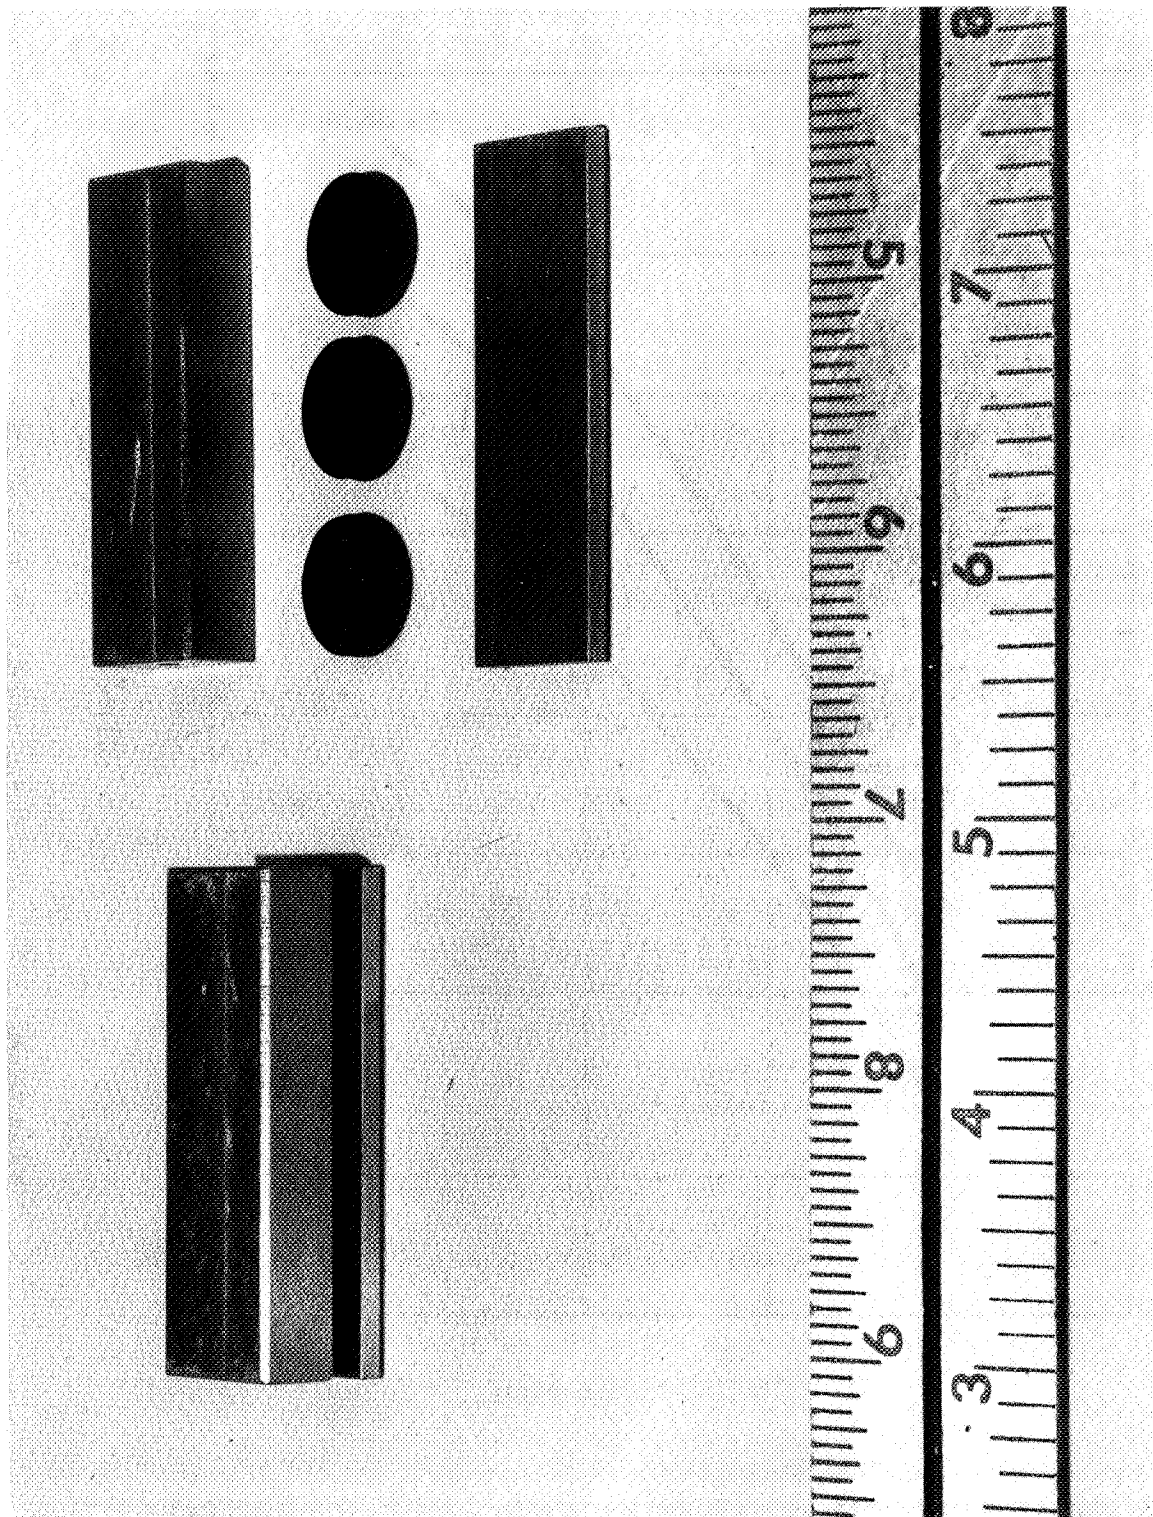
Detail View of Elastomer Cartridge During Assembly
